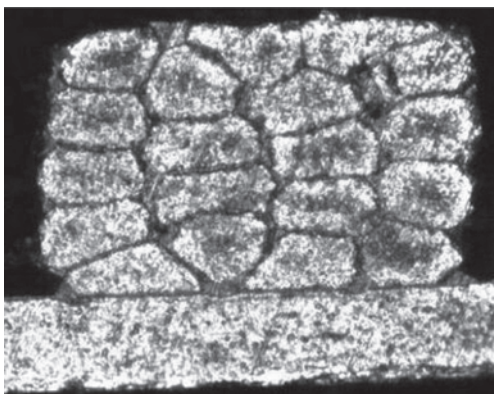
Compacting and resistance projection welded joint: cross-section (thickness of the terminal is 200 microns)
